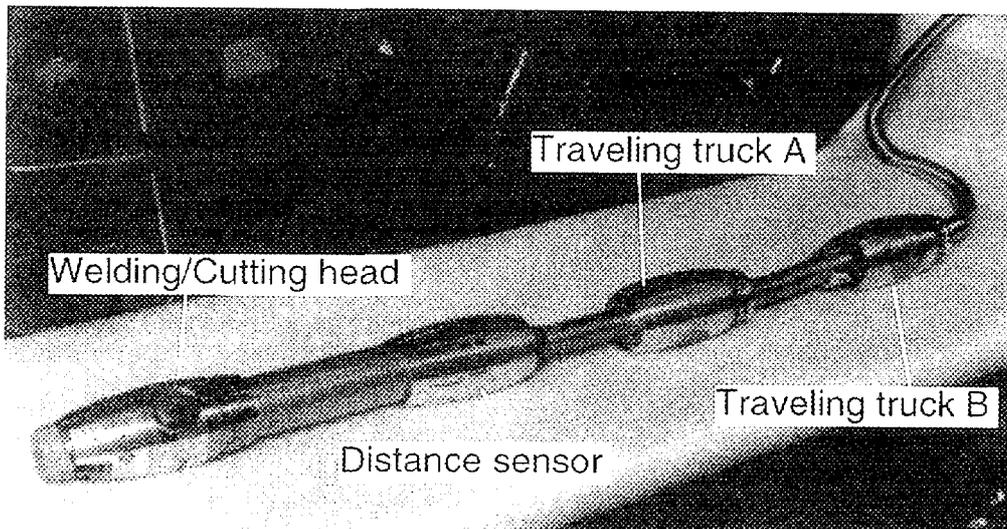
Laser based pipe welding/cutting bore tool
